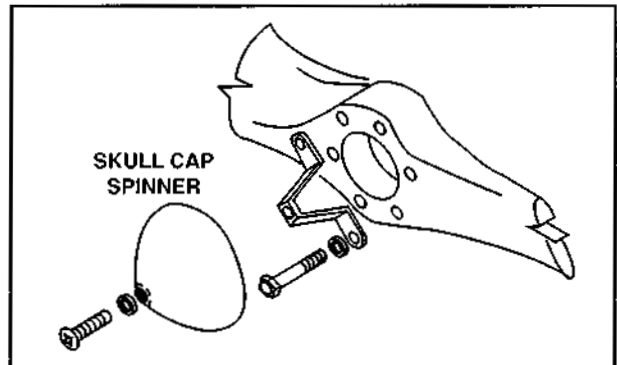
Some small training aircraft with flange-mounted propellers use a skull cap spinner that requires a mounting bracket installed under two of the propeller mounting bolts.
